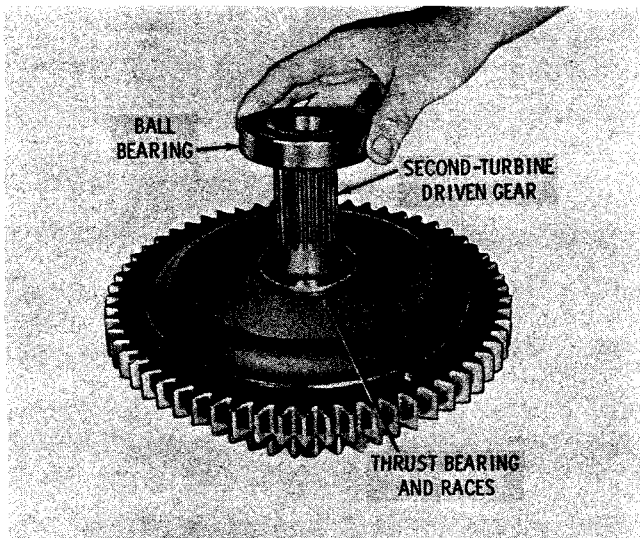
Installing ball bearing onto second-turbine driven gear shaft
